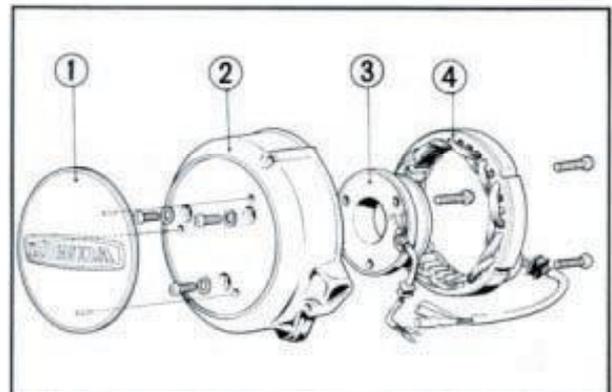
① Side cover ② Generator cover ③ Field coil ④ Stator coil
